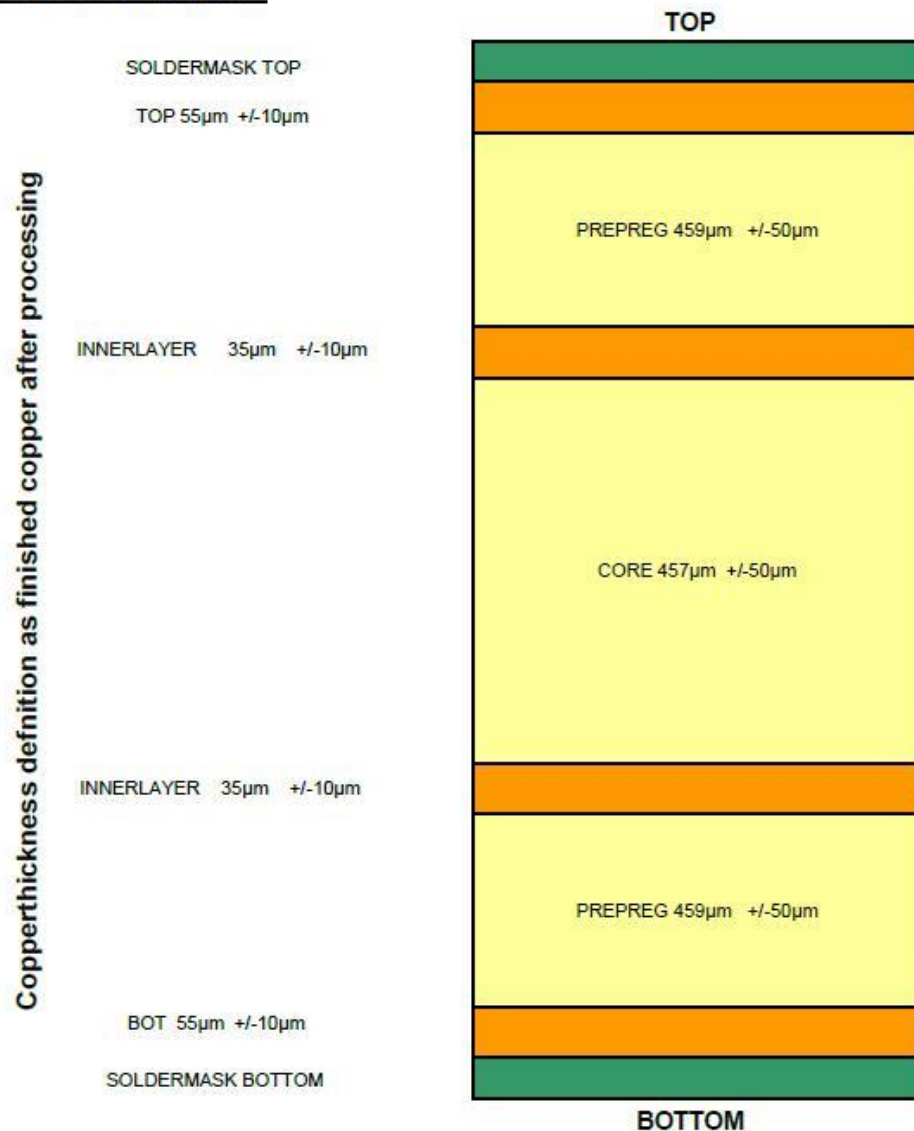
Recommended PCB stack-up information for use while integrating M100 module.
